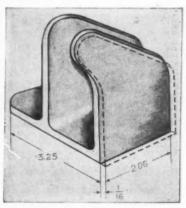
Details and dimensions of the aircraft component being machined in Fig. 7.
